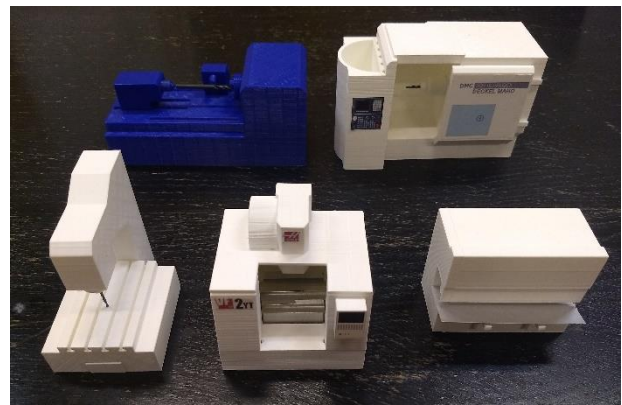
From left to right, first row: a) Lathe; b) Machining center; second row: c) Vertical drill; d) Vertical mill; e) Press brake;
